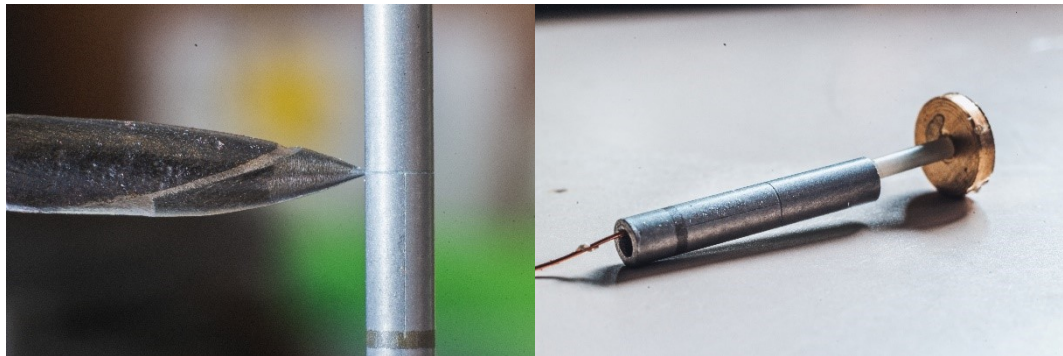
a) detail of piezoelectric tube scratching through the Widia tip; b) tip canula and brass ring system insertion into a piezoelectric tube with already divided sectors.
